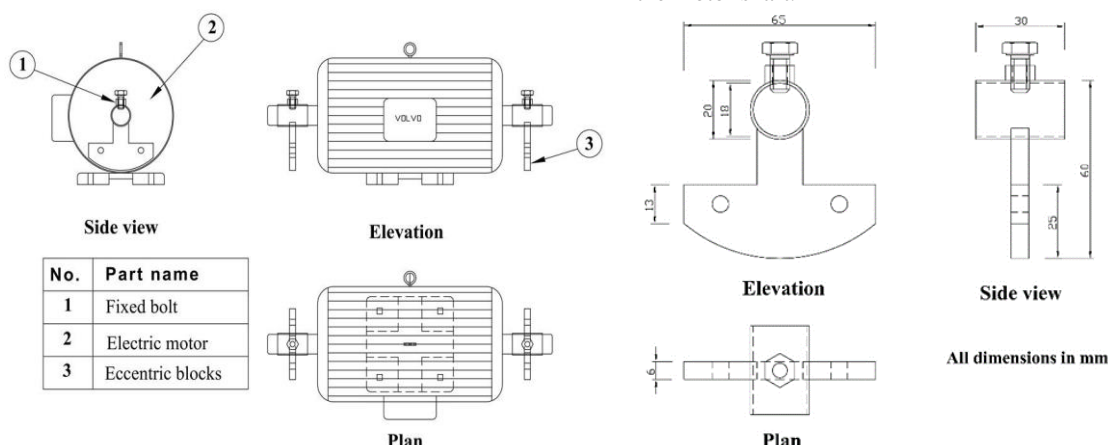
parallel blocks on the motor shaft and rotating within the same direction.
